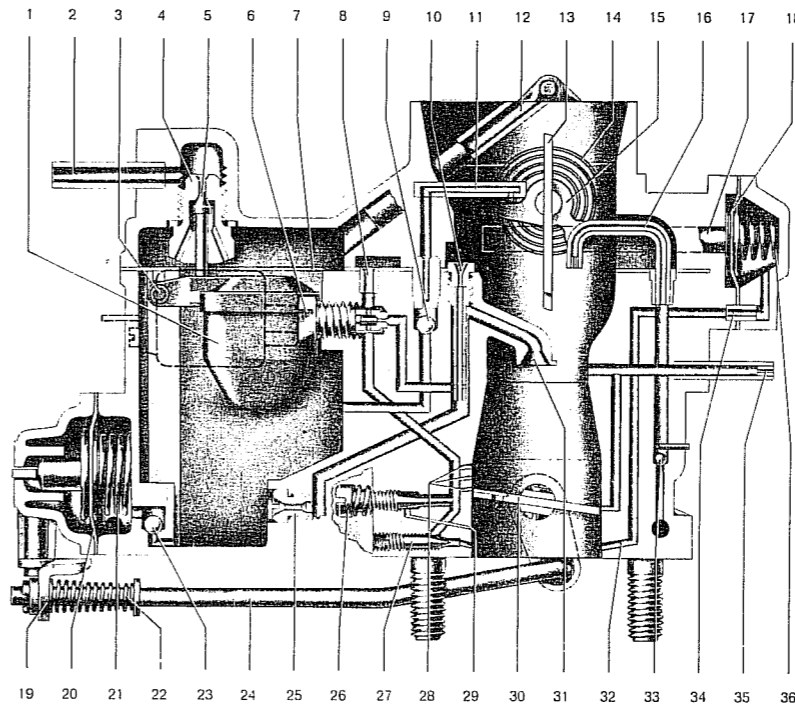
Sectional view of the Solex 30 PICT-2 carburettor.
